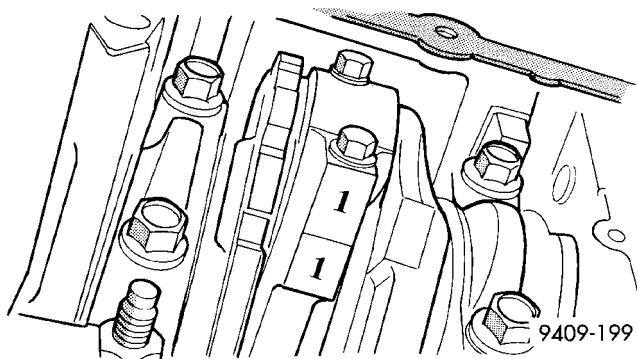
Identify Connecting Rod to Cylinder-Typical
